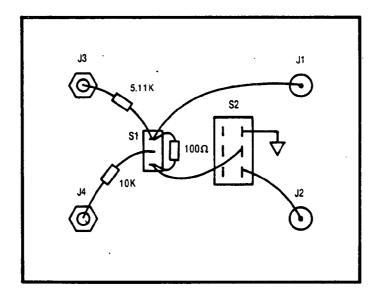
Special Test Fixture Fabrication Instructions (1 of 2)
